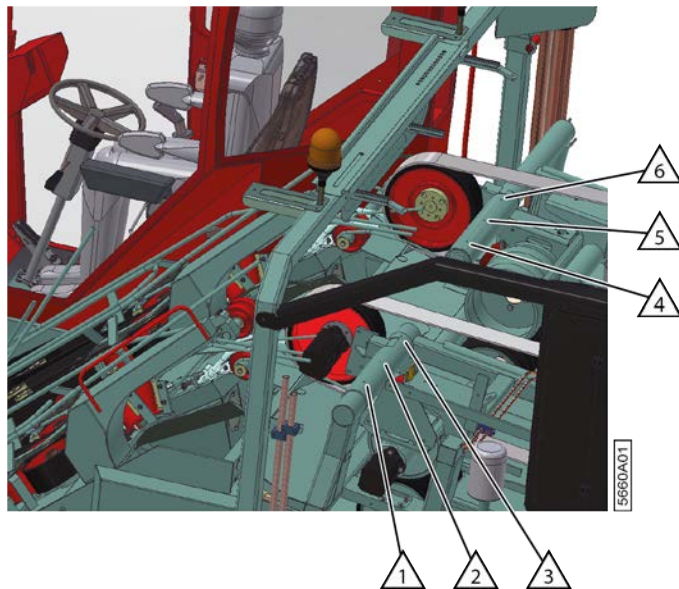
Lubricate the pivot shafts of the crushing rollers
